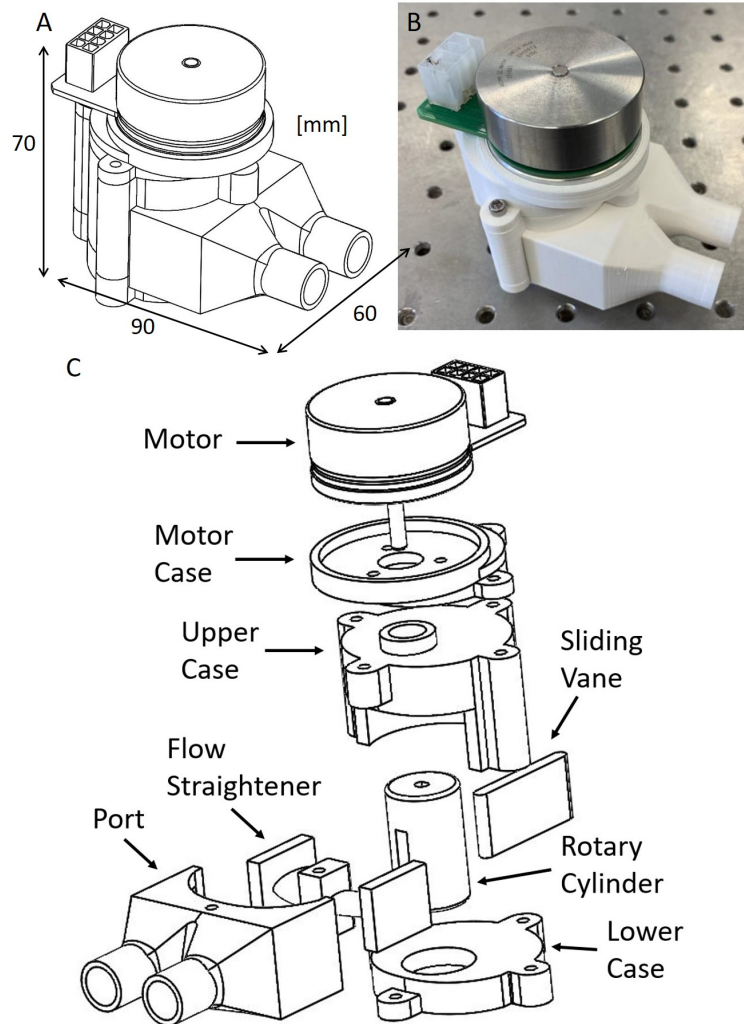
(A) isometric view of CAD design (B) exploded view of CAD design (C) isometric view of first prototype on an experimental bench table.
